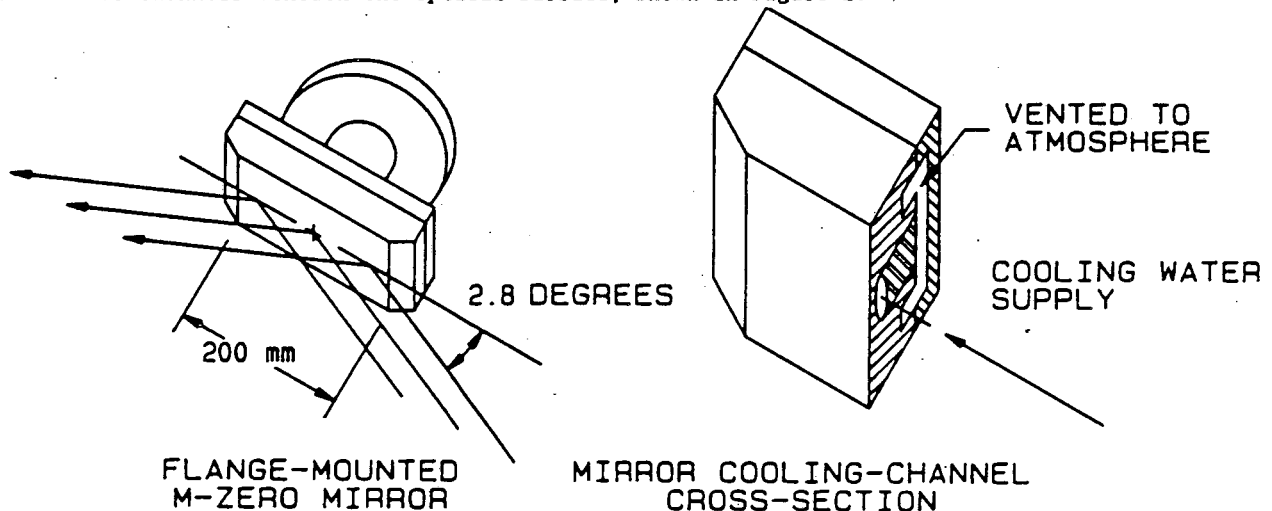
M-Zero Design Configuration. The mirror is a brazed, box-like assembly with a machined water channel beneath the optical surface. A separate mask (not shown) prevents beam impingement on the front end of the mirror.
